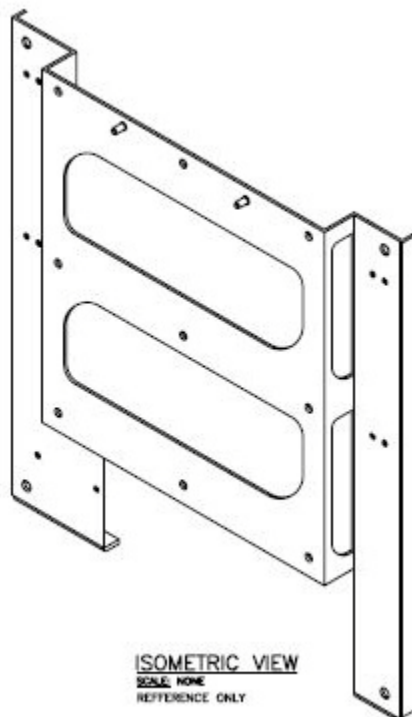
Isometric view of base plate showing top, bottom and side openings for cables
